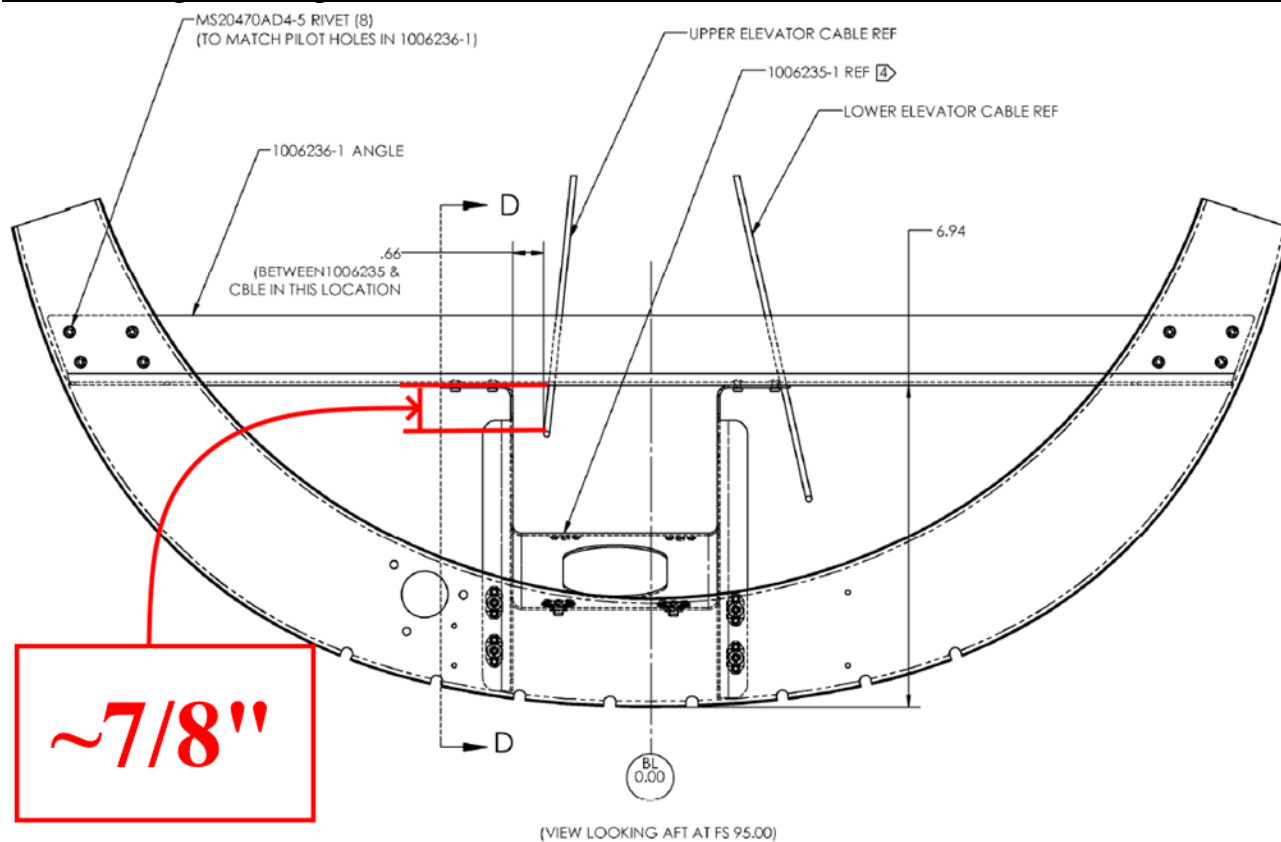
ANGLE TO UPPER PITCH CABLE CLEARANCE
